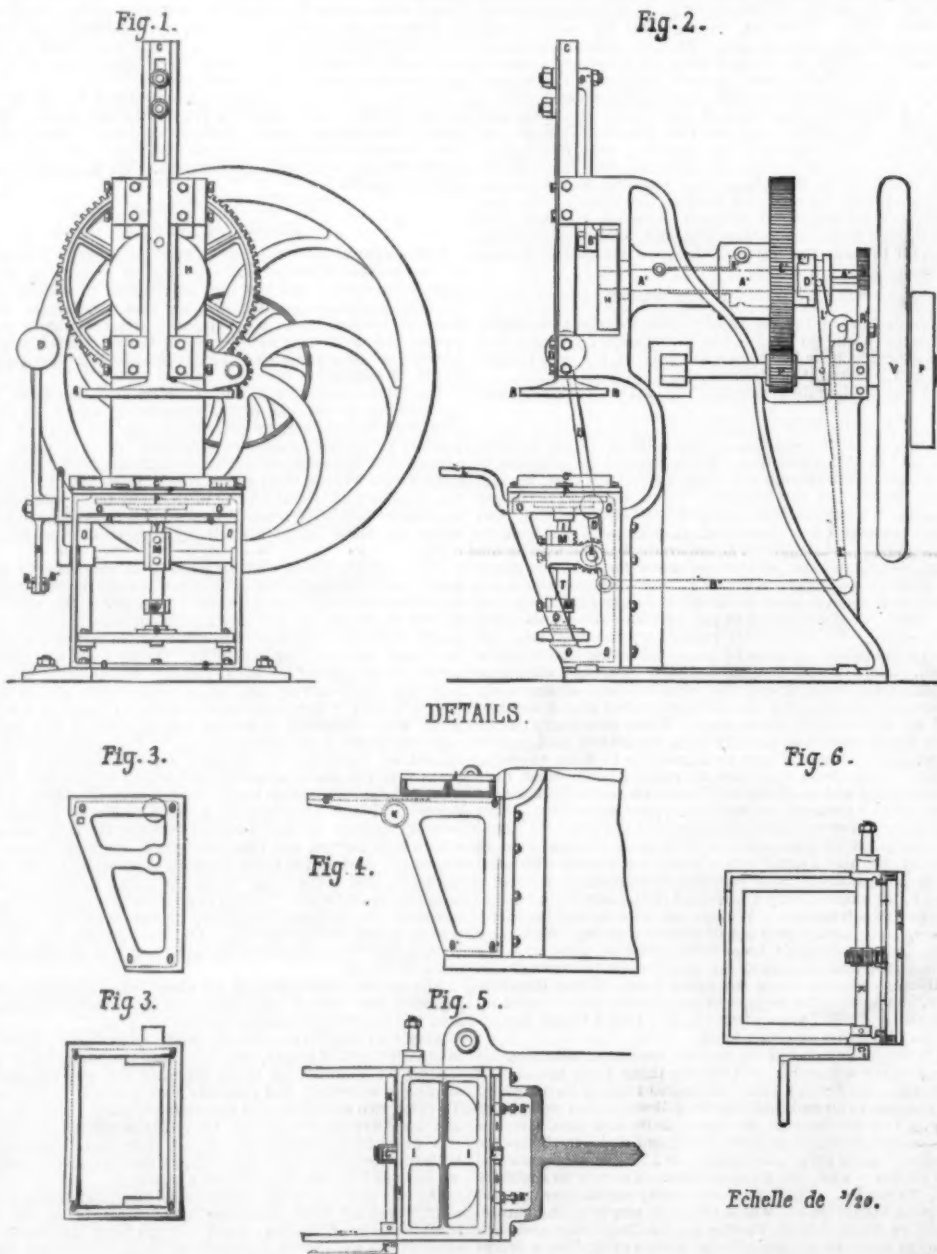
Front View. FIG. 2.—Side View. FIGS. 3-6.—Details of Moulding Table.
